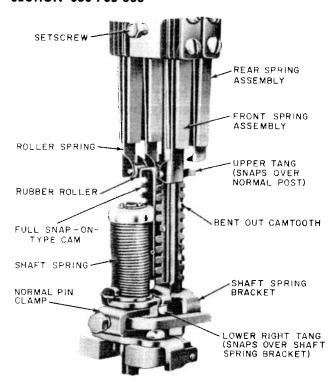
Normal Post Spring Assembly Having Rubber Rollers Operated by Full Snap-On-Type Cam
